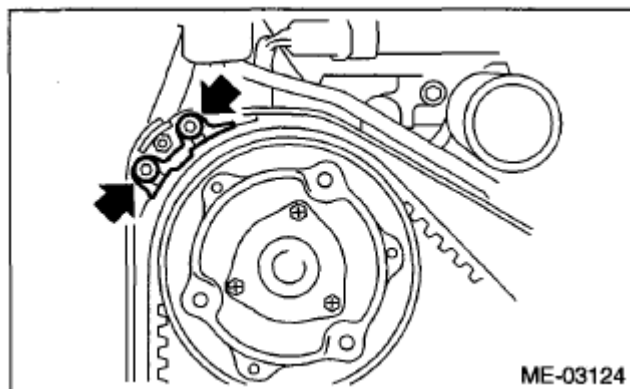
Locating Timing Belt Guide Mounting Bolts (2 Of 4)
